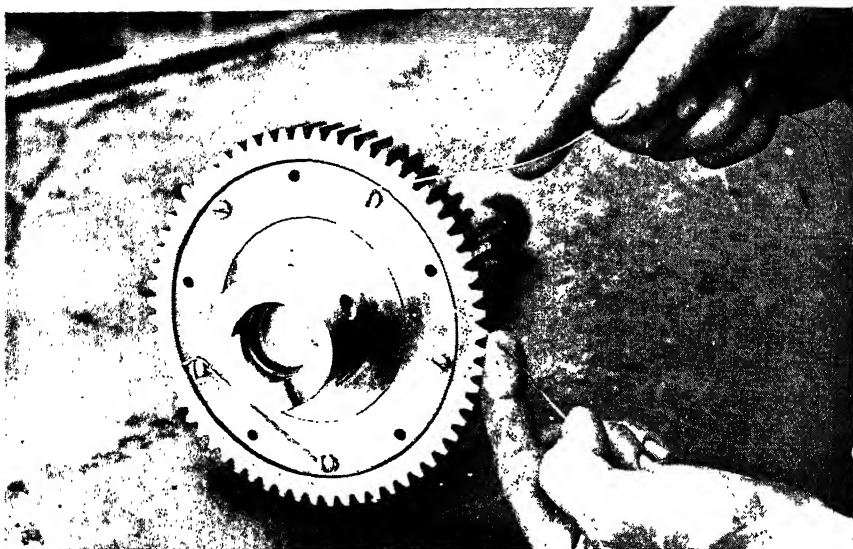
WIRE LOCKING SCREWS ON SPRING DRIVE
